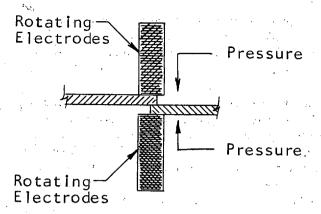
shows the characteristic differences between spot and seam welding. The important difference between spot and seam welding is that in spot welding the electrodes are withdrawn out of contact with the weld area after each individual weld or simultaneously made group of welds, whereas in seam welding at least one rotating electrode maintains continuous pressure on the weld area.
